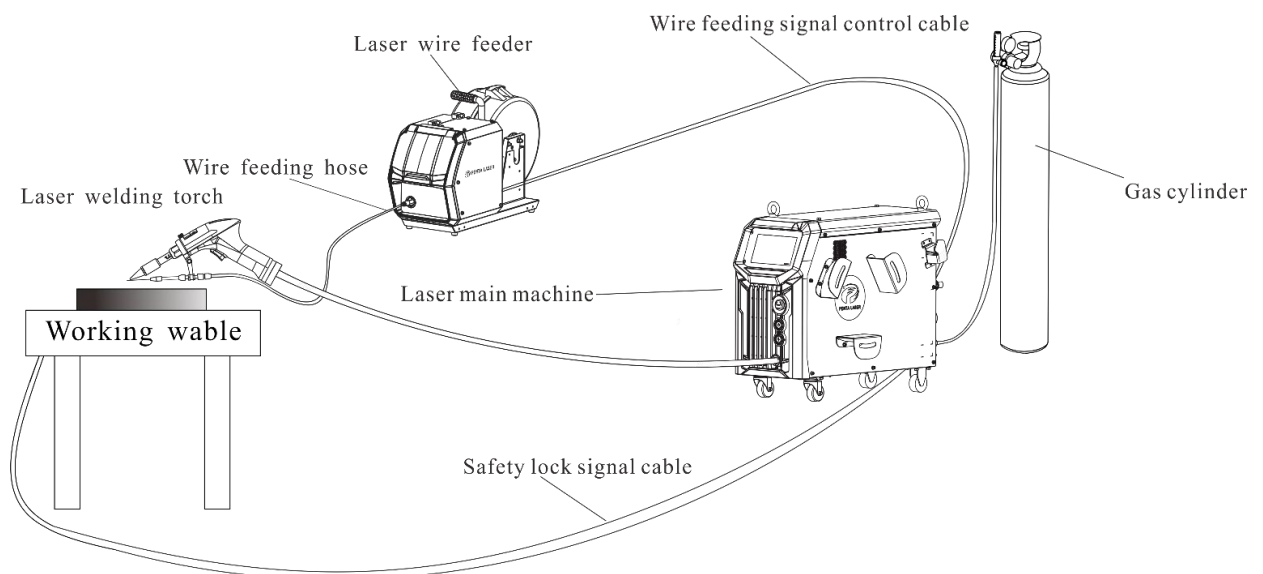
Connection diagram of HW 800-A/HW 1200-A hand-held fiber laser welding system
